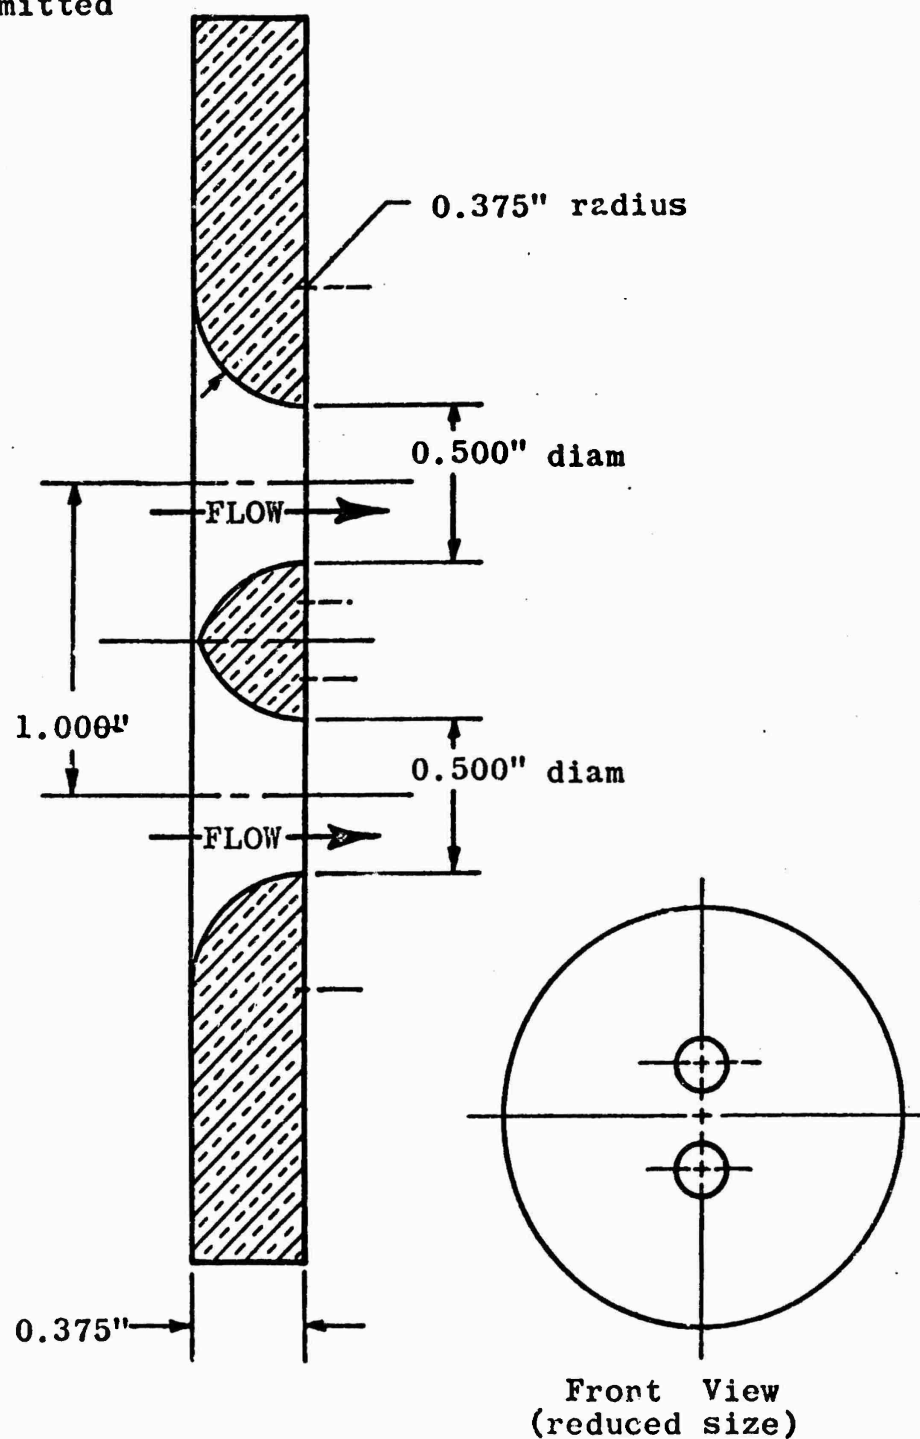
TWO 0.500 INCH DIAMETER NOZZLES 1.000 INCH
